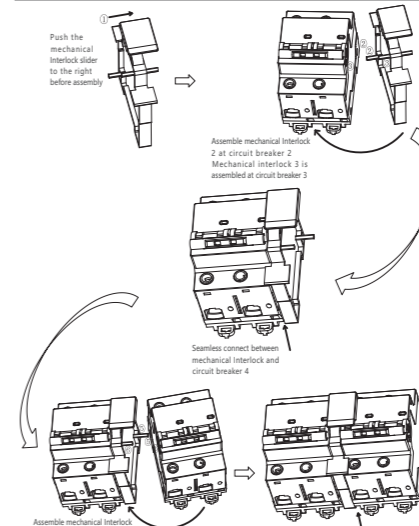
LMI-12 / 13 mechanical interlock assembly mode diagram
